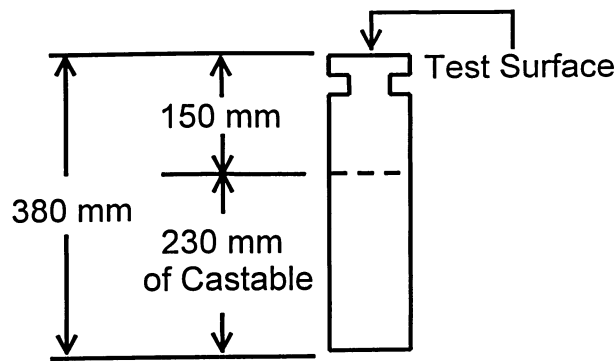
Dimensional Sketch of the Hanger Brick (70% Alumina)
